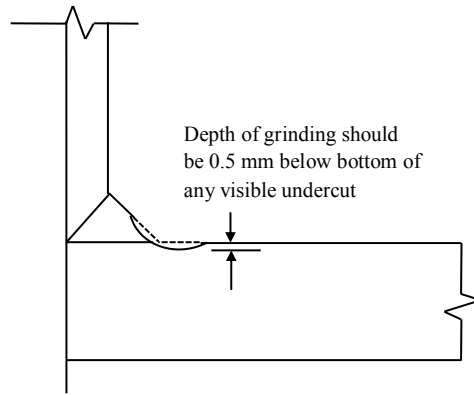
Weld toe grinding (DNV 2010).
